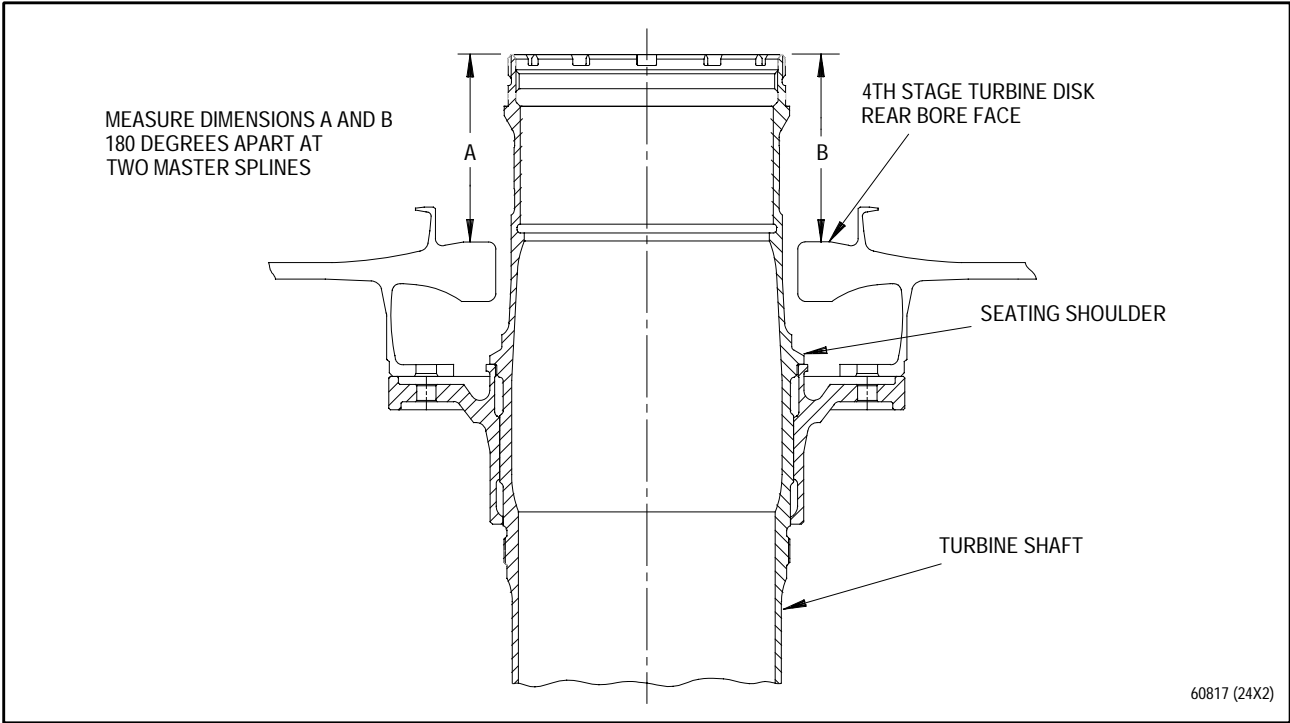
Front Compressor Drive Turbine Shaft - Measurement After Seating
